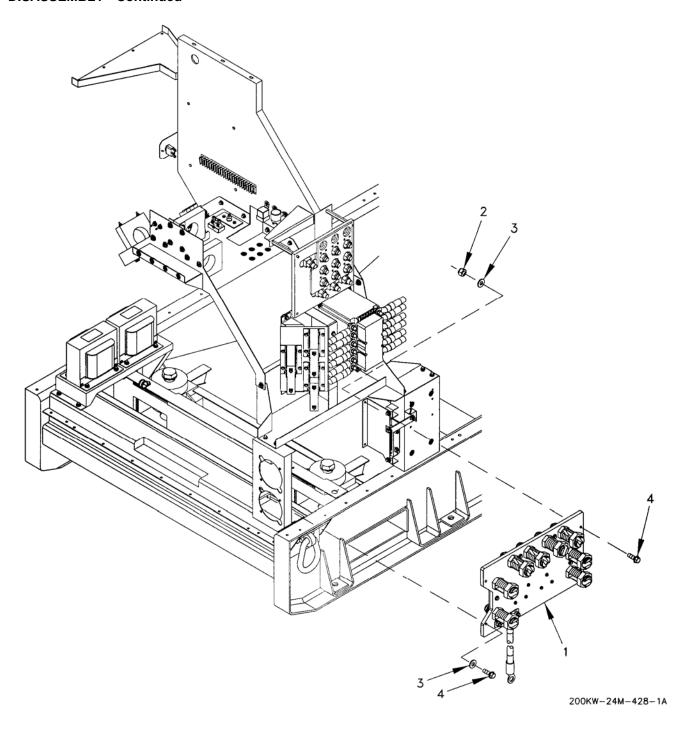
Load Terminal Board Assembly (Sheet 1 of 2).
